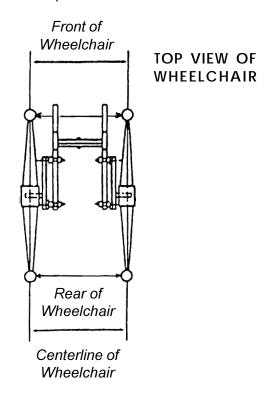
ADJUSTING REAR WHEEL CAMBER
